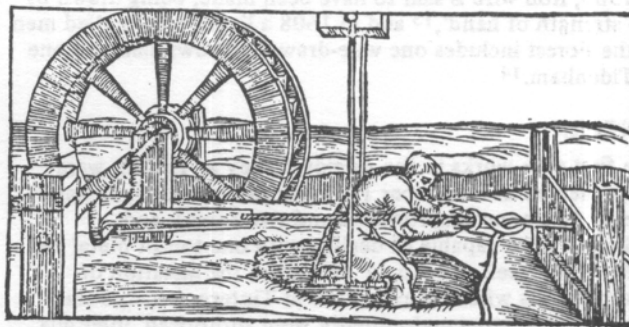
Water-powered machine for drawing iron wire, as shown by Biringuccio in 1540.
